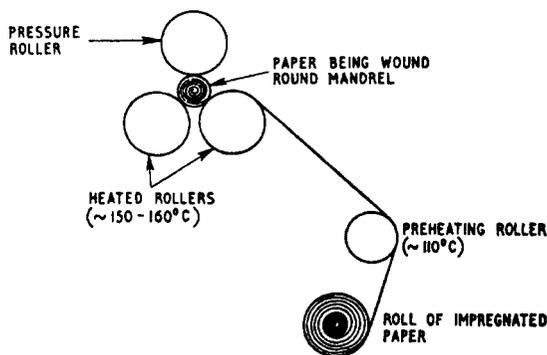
Three-roller tube winding machine. (After Brown⁹)
